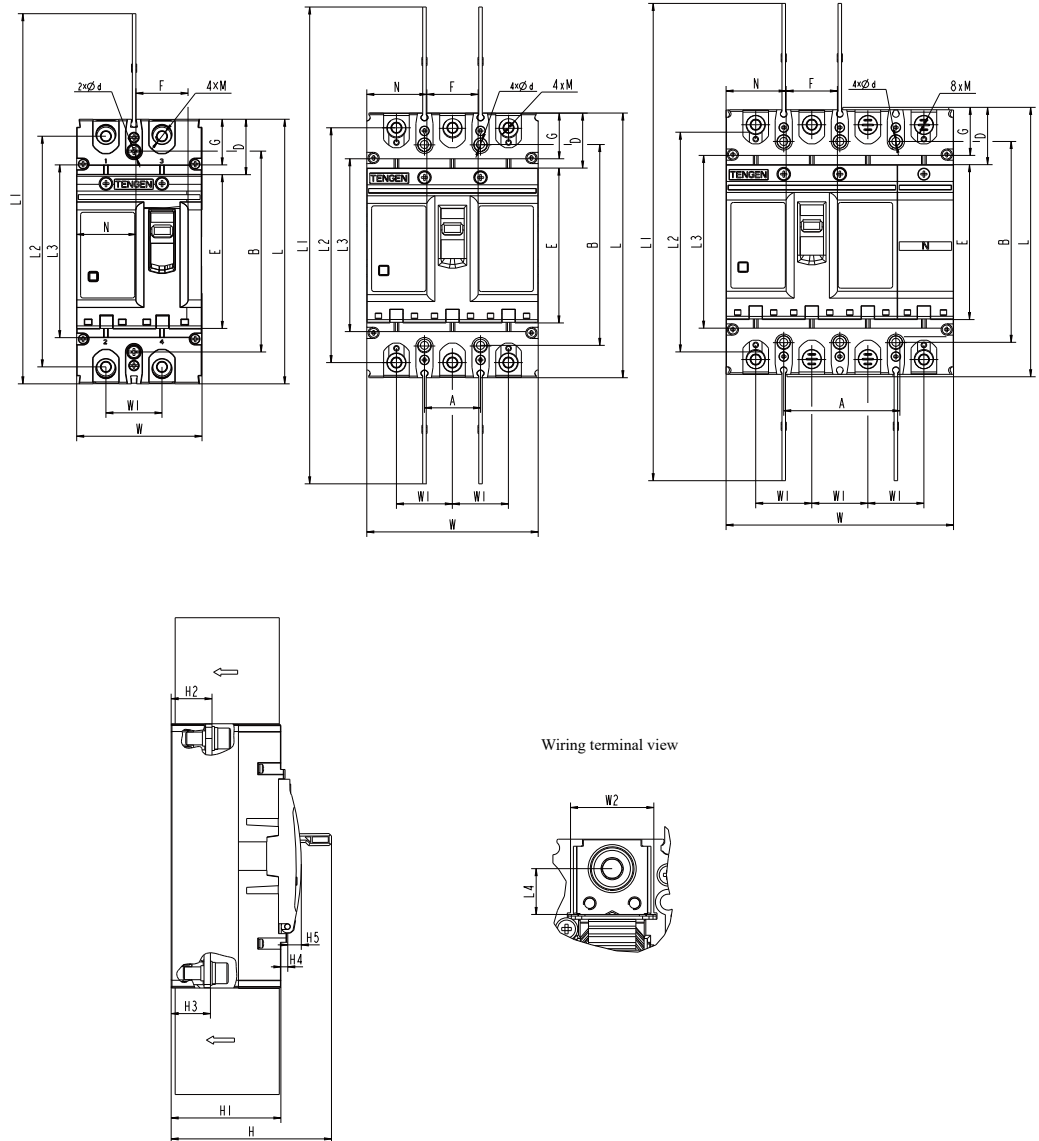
TGM3DC-125~800 outline and installation dimensions
